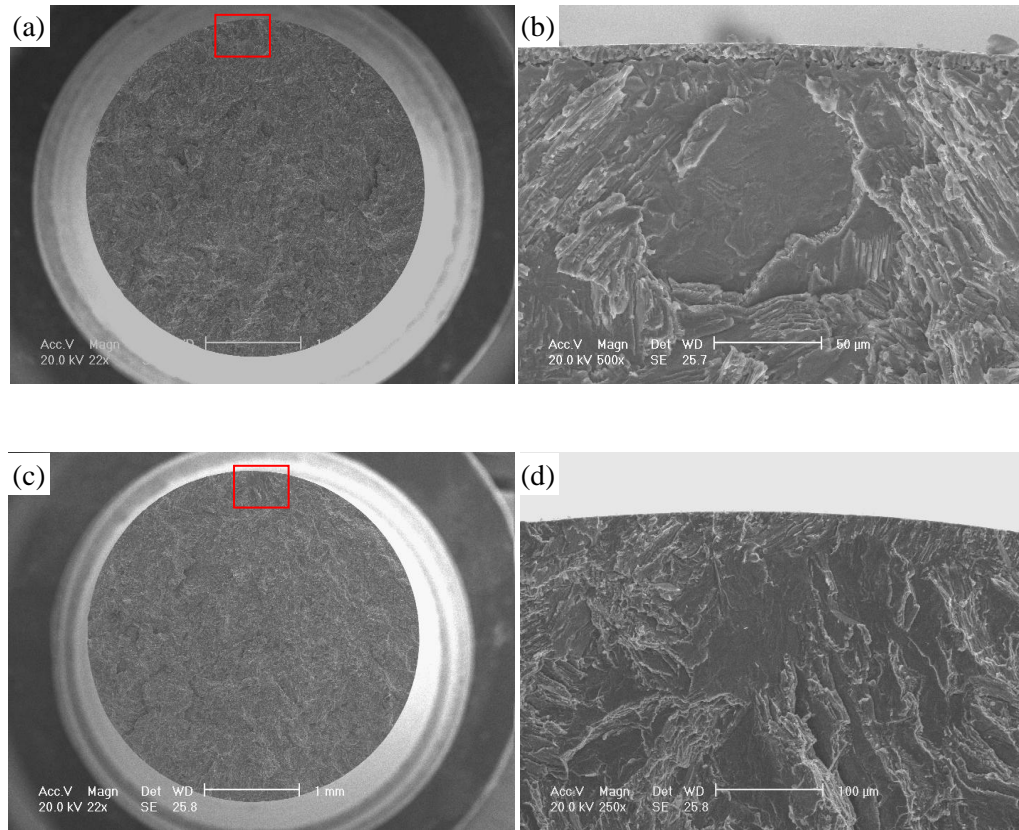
SE SEM images of fracture surfaces of failed tensile test pieces, showing (a) and (b) from the as-HIPped test pieces containing γ layer and (c) and (d) from the HIP + γ layer hand ground test pieces. (a) and (c) are overall surface morphologies and (b) and (d) the corresponding crack initiation areas from the regions marked with red rectangles in (a) and (c), respectively.
